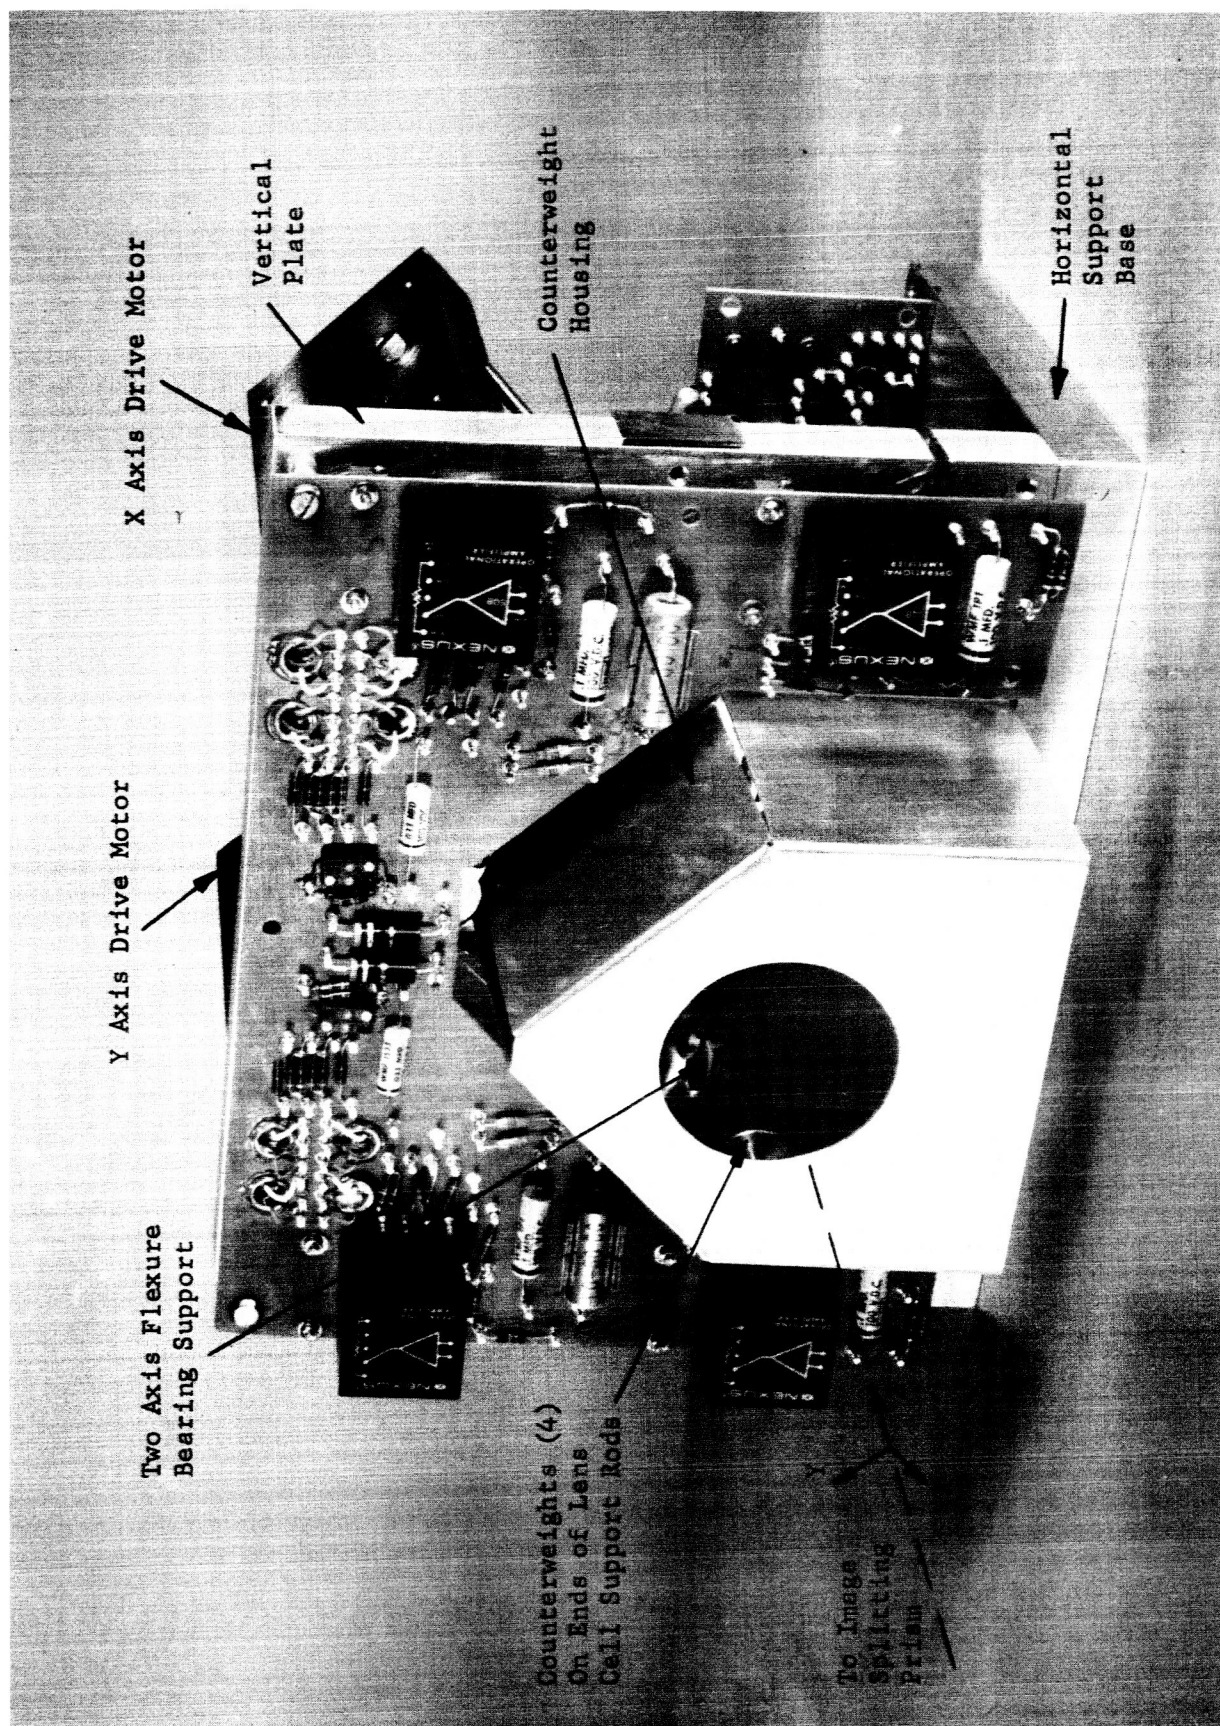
Transfer Lens Mechanical Subassembly, Rear View
